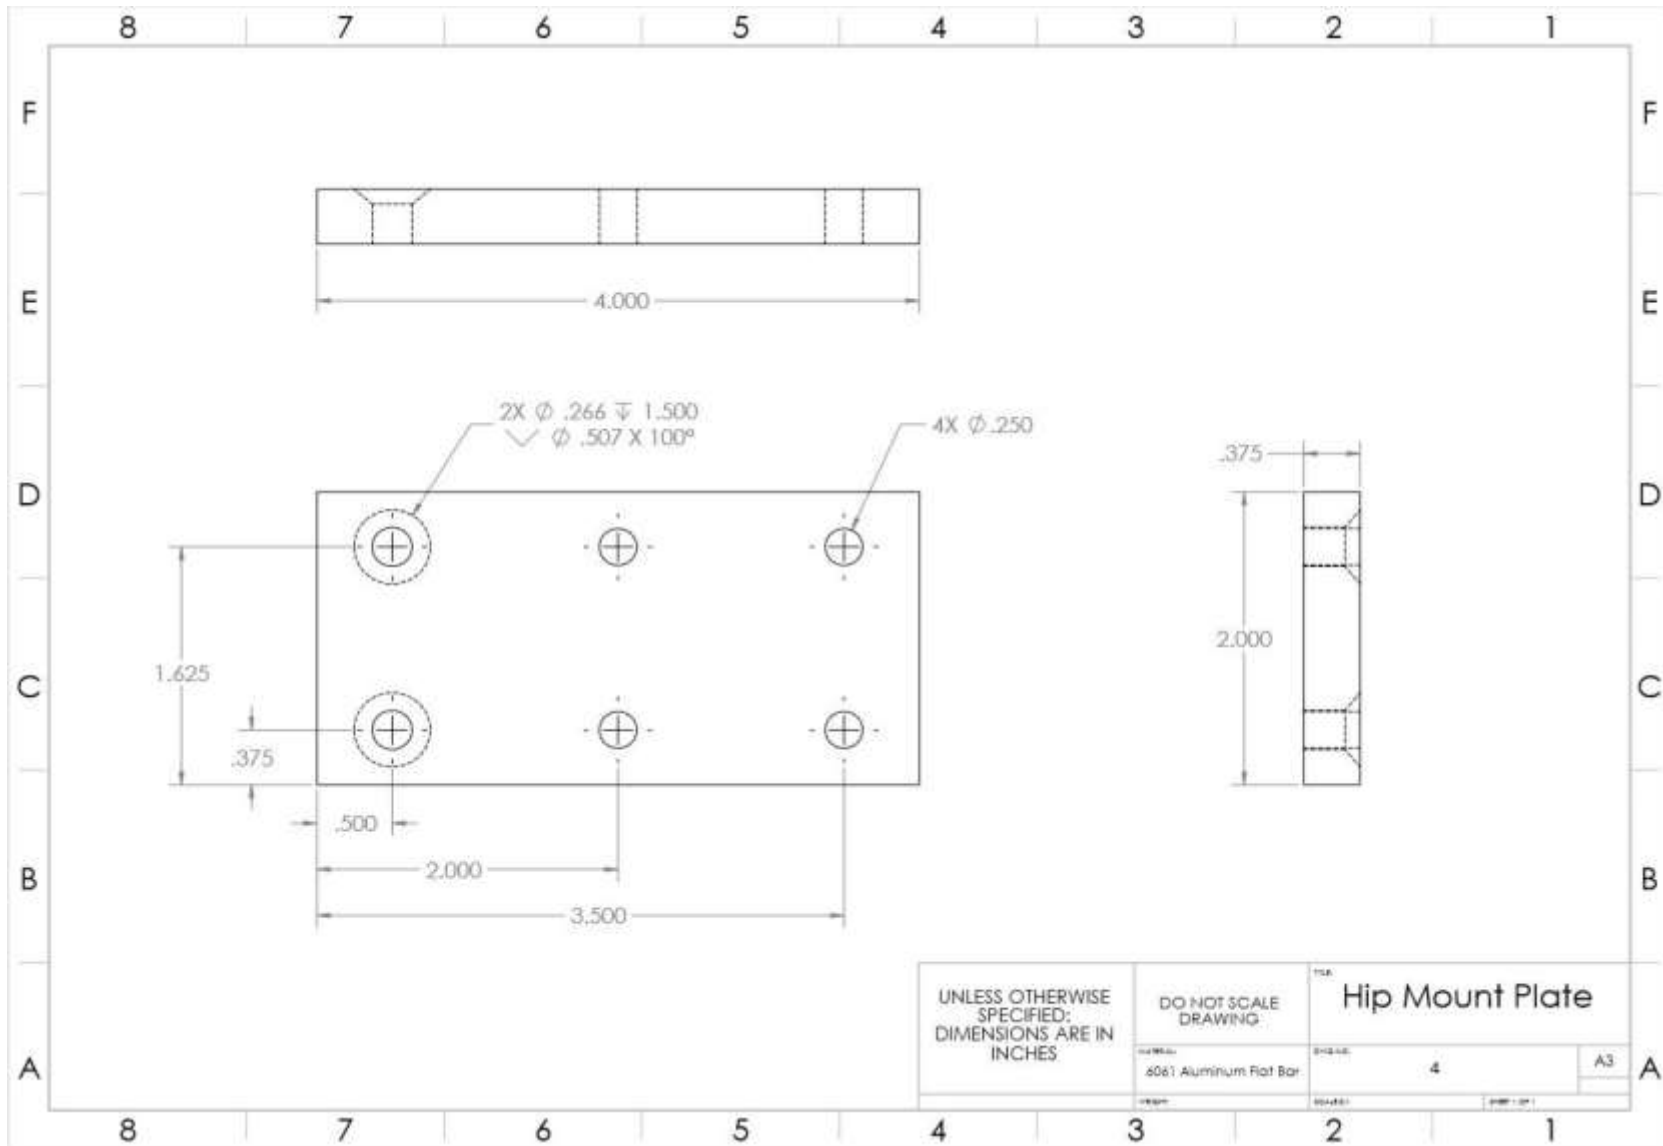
4. Mechanical Drawing of Hip Mount plate.
